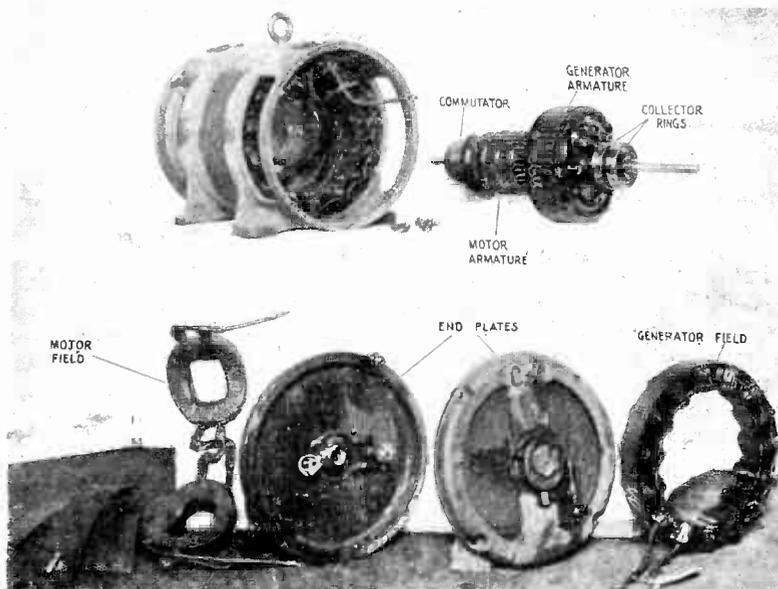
A DISASSEMBLED VIEW OF A CROCKER-WHEELER MOTOR-GENERATOR SET
